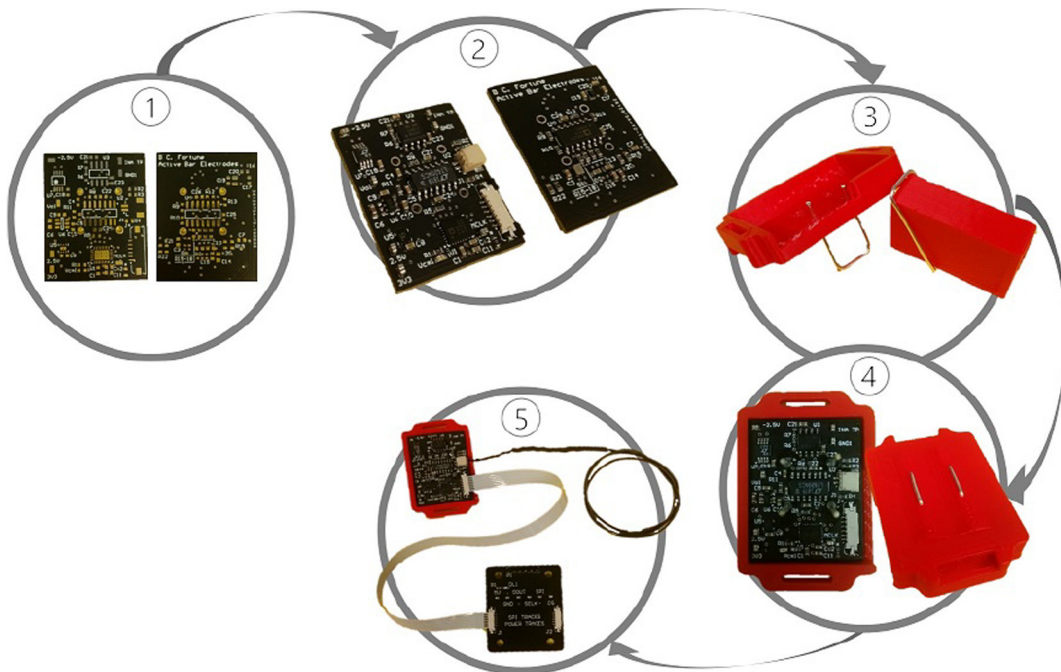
Assembly process of the EMG board. The EMG board is shown to be connected to the cable adapter board in the final stage.
